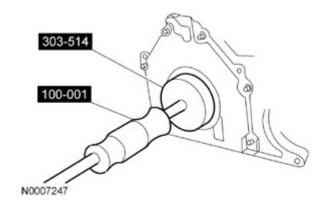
Removing Crankshaft Rear Oil Seal Slinger Using Special Tools Courtesy of FORD MOTOR CO.
